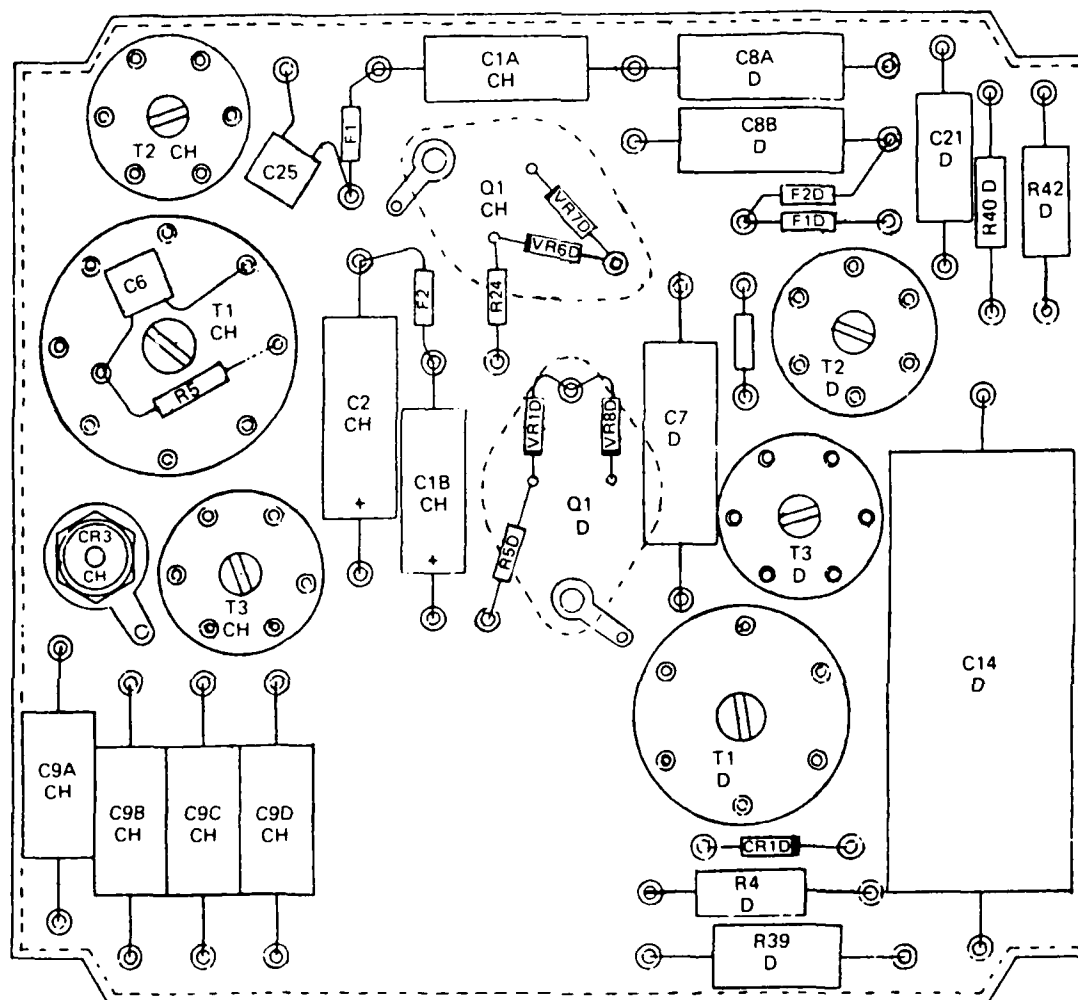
Plasma Generator Electronics (shelf 2) assembly component layout.
